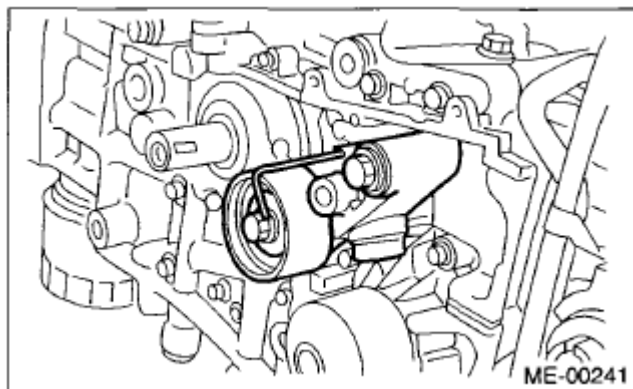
Identifying Automatic Belt Tension Adjuster Assembly
